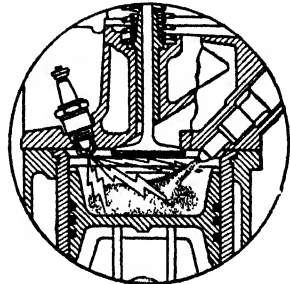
Head of Allis-Chalmers oil tractor engine.
